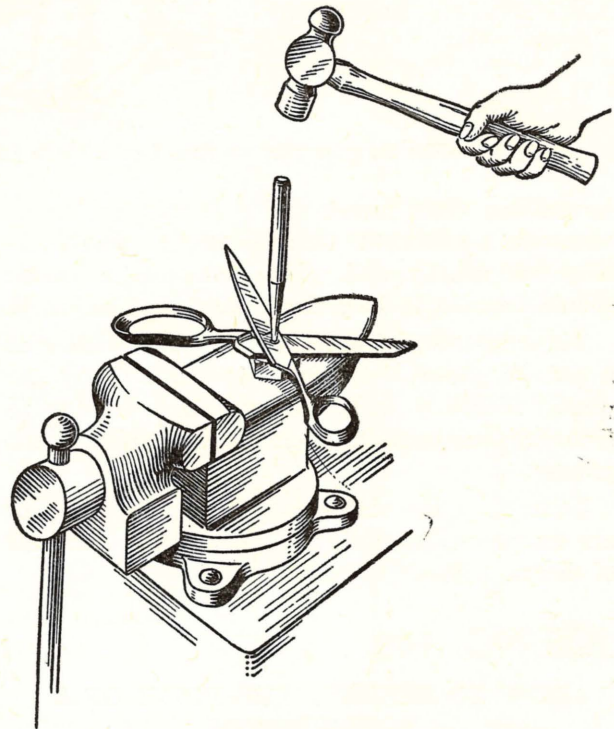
Drive the old screw out and replace it with a new one. It may be necessary to grind or file the old nut off
